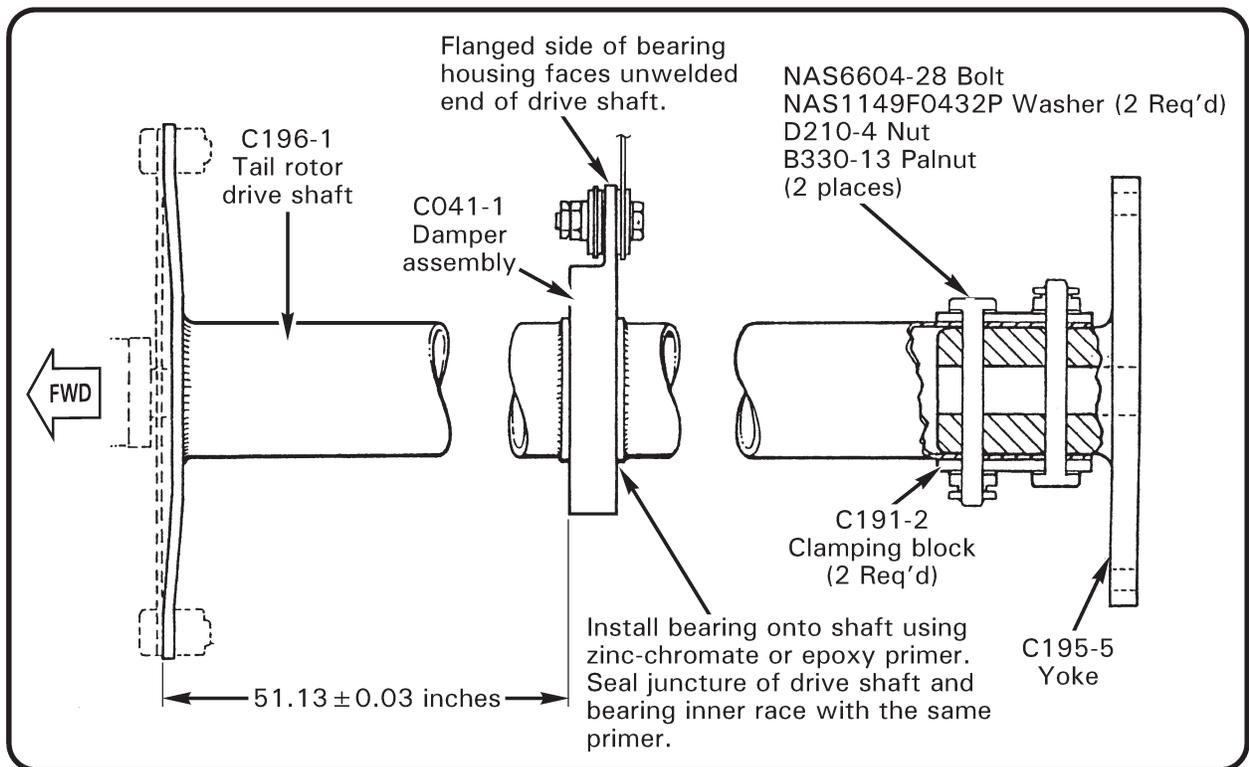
B C196-1 TAIL ROTOR DRIVE SHAFT
